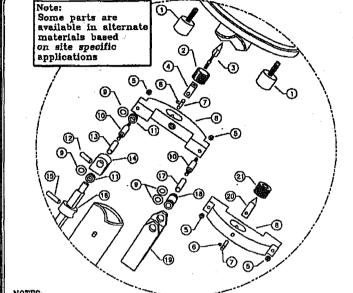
Exploded View of a Bottom-Loading AutoPump AP-4 (Long & Short)
